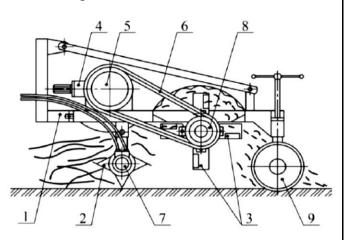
Schematic of the grape vine pruning residue pick up chopper (1-frame; 2-pick-up system; 3chopping chamber; 4,5-drive and intermediate gear; 6-belt; 7- hydraulic motor; 8- clutch for chopping unit; 9-gauge wheel) (Adamchuk, 2016).
